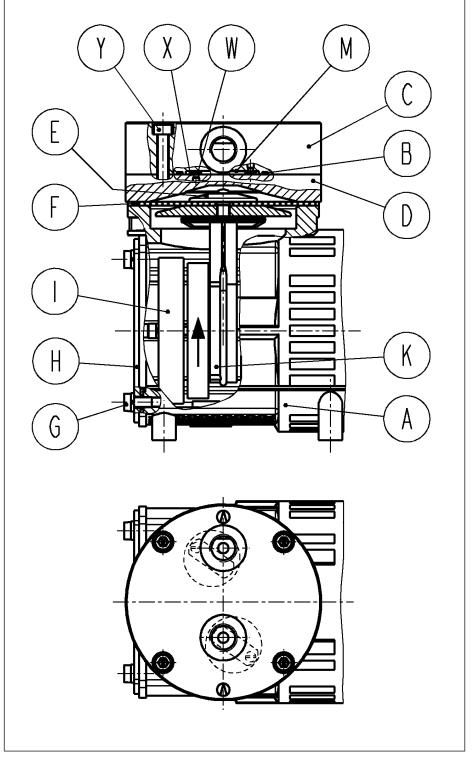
Pump parts for pump models with smooth heads and reed valves (stainless steel, symbolic)
